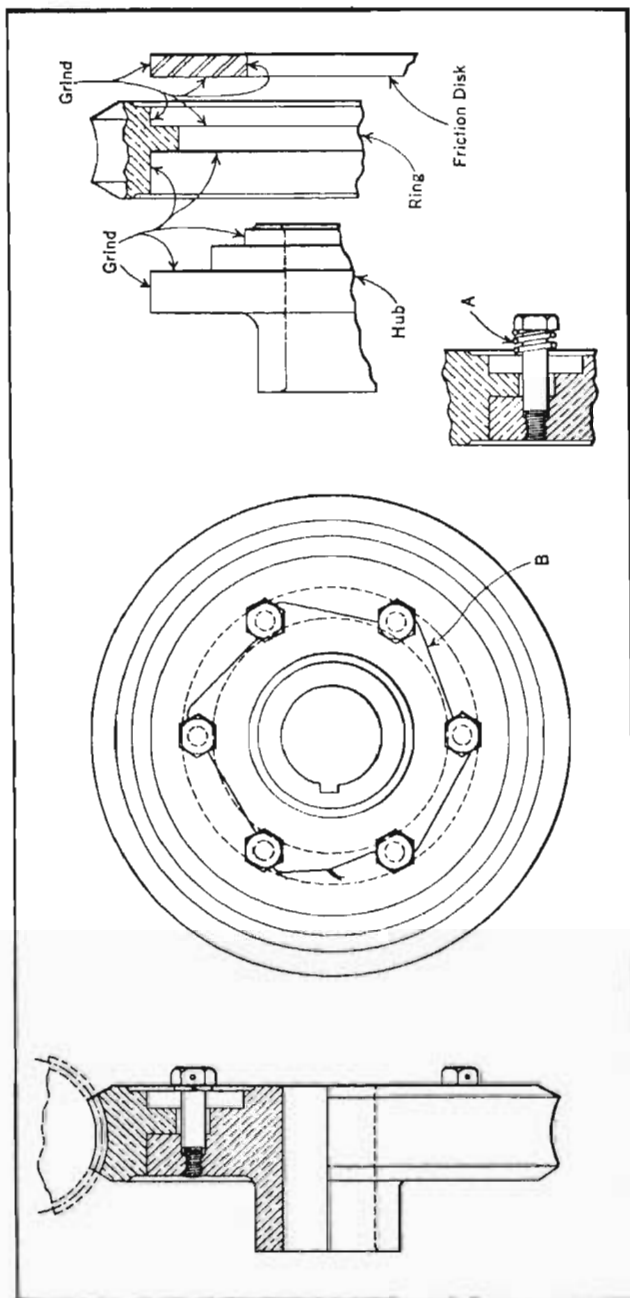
Worm-gear with Friction Clutch that Prevents Overloading the Driving or Driven Units
